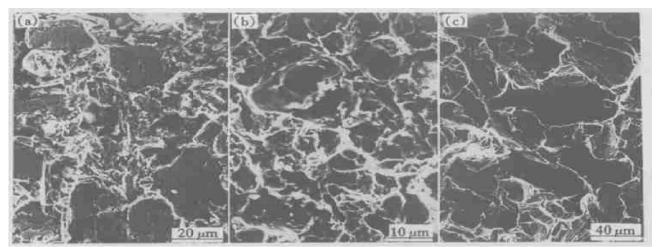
Tensile fracture surfaces of Cu Al Be and 1 Crl 8 Ni9 Ti with different interlayer at different welding parameters
